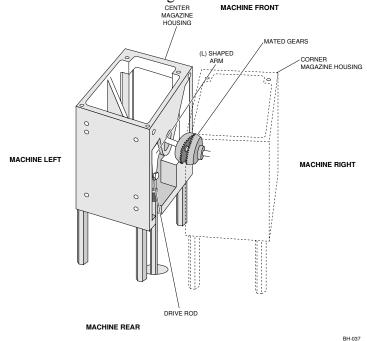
Rear-Side View of Magazine Gears and Drive Rod
